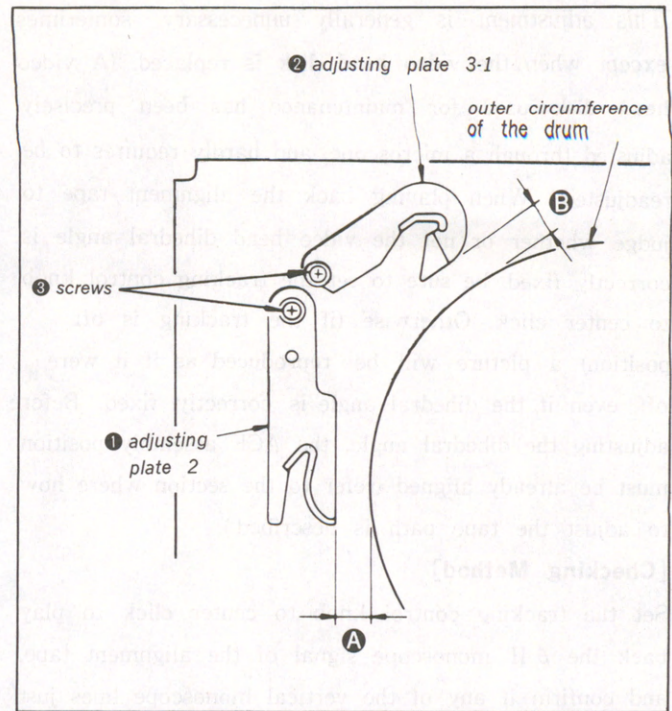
Detecting the positions of the adjusting plates 2 and 3-1.
